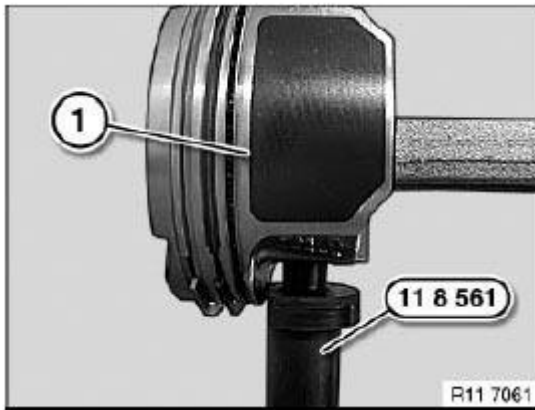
Securing Piston With Conrod To Special Tool (11 8 561)
